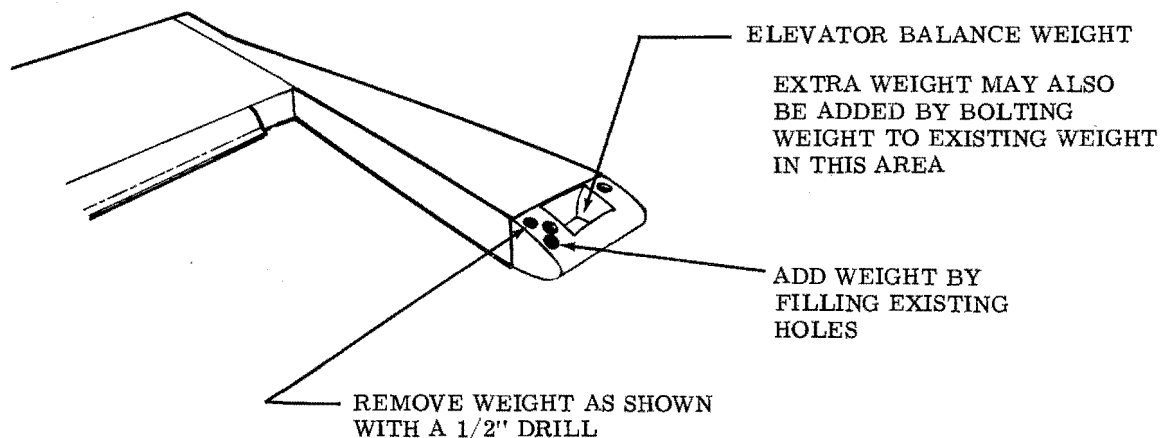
Static Balancing Aileron, Rudder and Elevator (Sheet 4 of 4)
